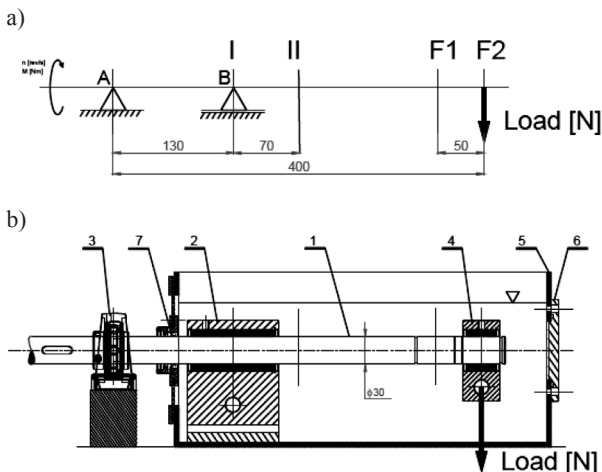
Test stand: a) test stand diagram, b) test stand cross-section: 1 – shaft, 2 – support of tested bearing, 3 – rolling bearing, 4 – sliding bearing through which load is applied, 5 – tank filled with water, 6 – cover, 7 – seal
